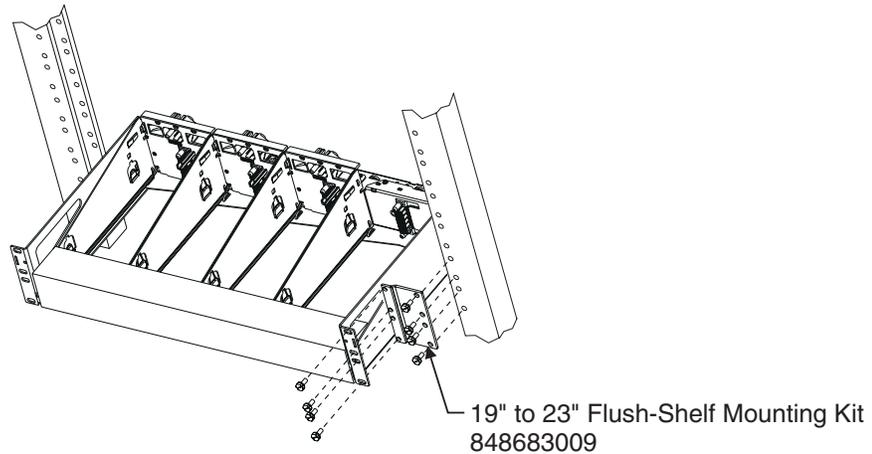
19-inch to 23-inch Flush-Shelf Mounting
